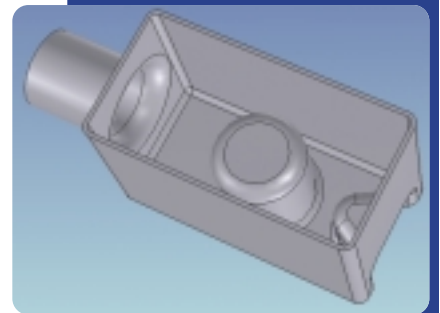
In this part, I added fillets to many edges, then shelled it out.
